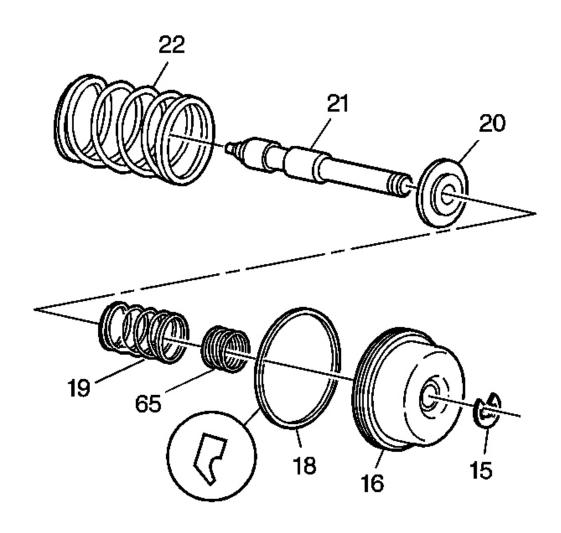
Identifying Servo Piston & Components Courtesy of GENERAL MOTORS CORP.
